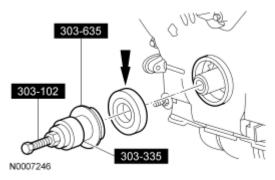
Installing Crankshaft Front Seal Using Special Tools Courtesy of FORD MOTOR CO.
